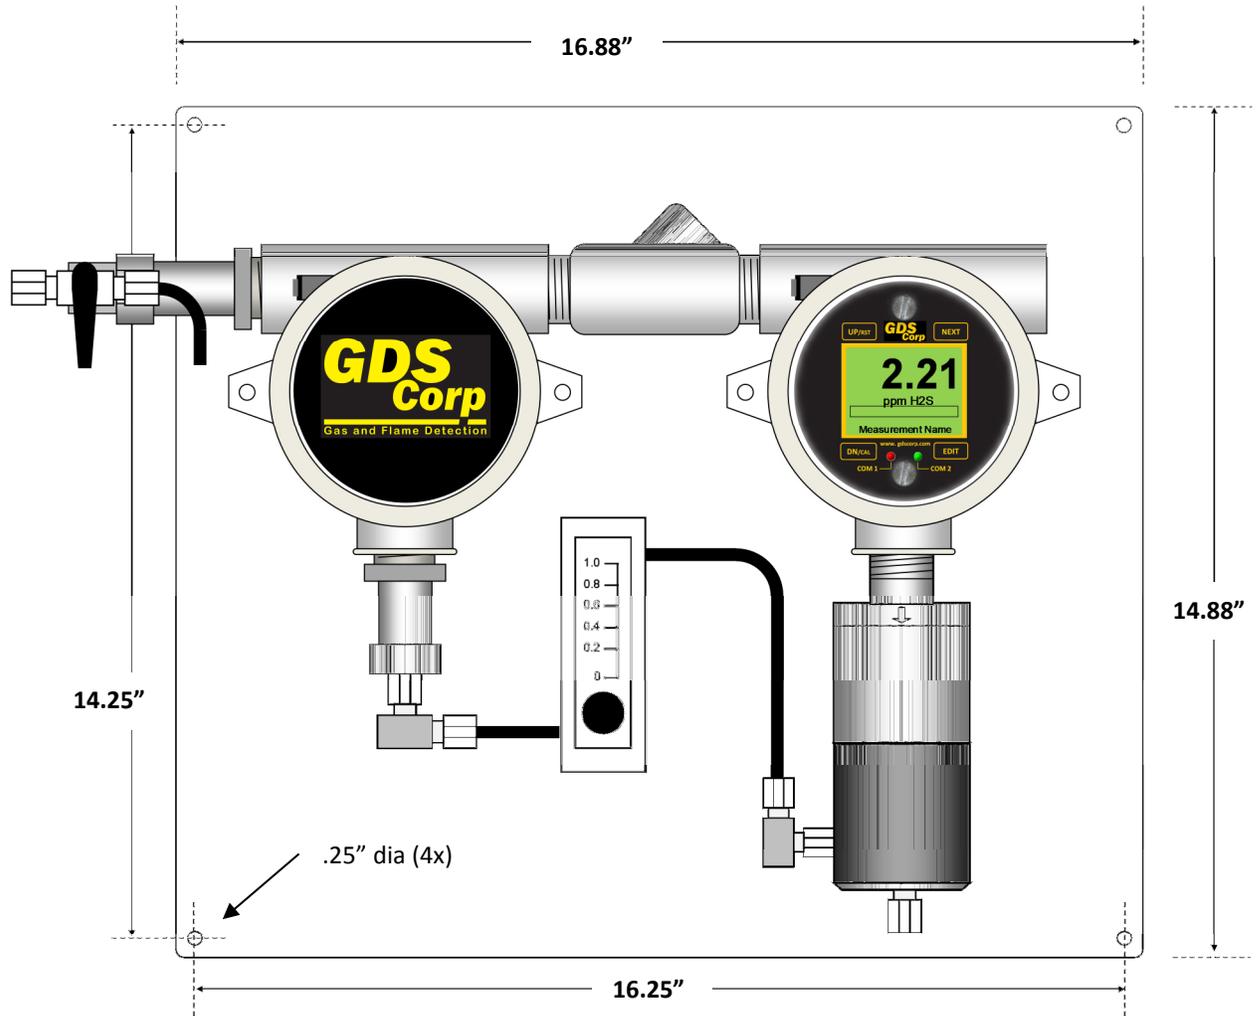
GDS-58NXP 17" x 15" Mounting Plate Dimensions
